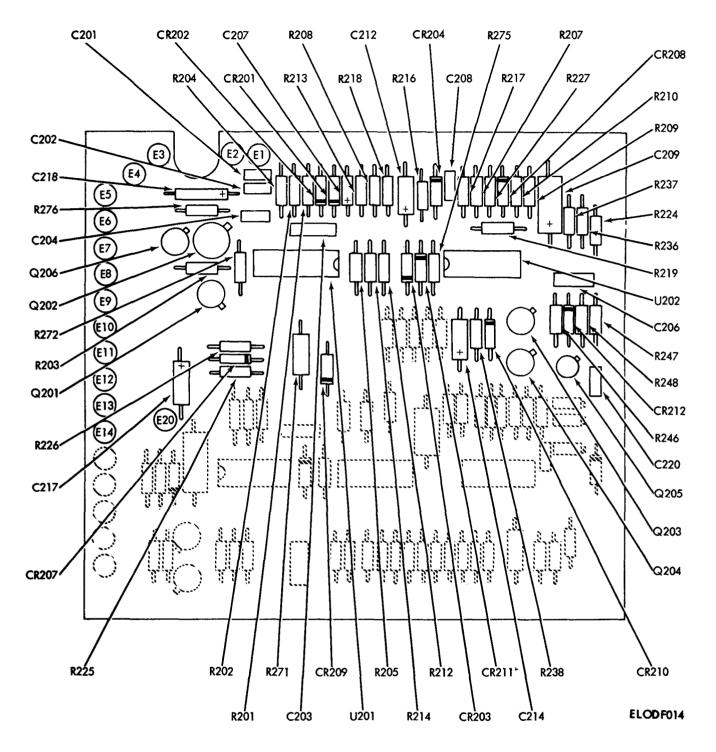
\bigcirc . A0 modulator and current sense printed circuit board assembly (A2) (sheet 1 of 2).
